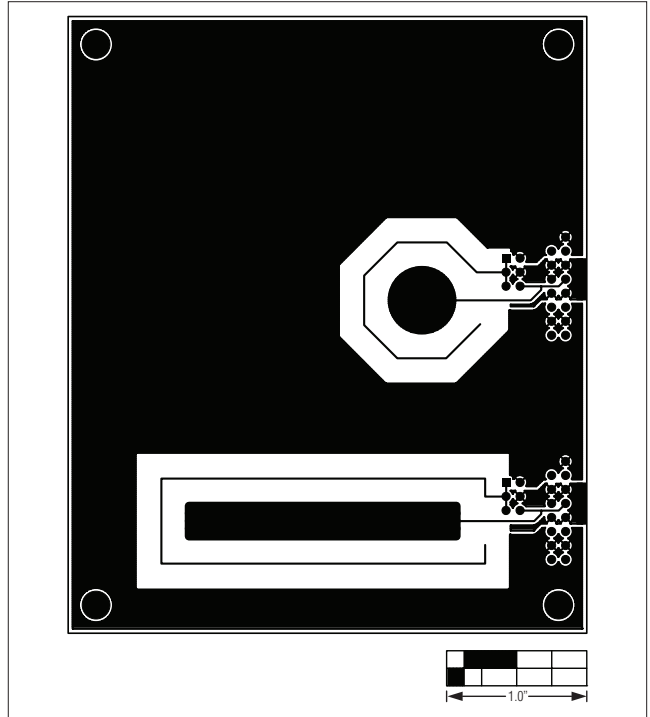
MAX1441TP EV Kit PCB Layout—Component Side
